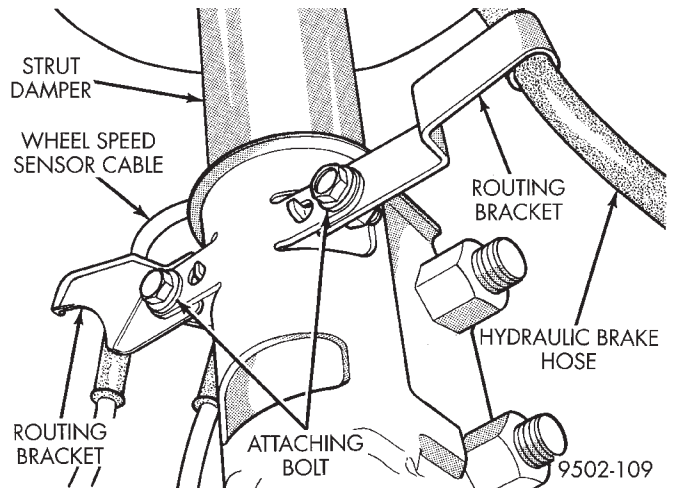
Brake Hose And Speed Sensor Cable Routing
